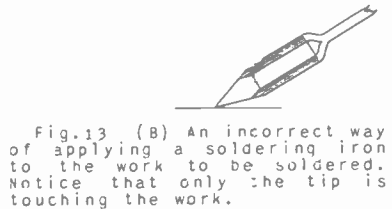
(B) An incorrect way of applying a soldering iron to the work to be soldered. Notice that only the tip is touching the work.
